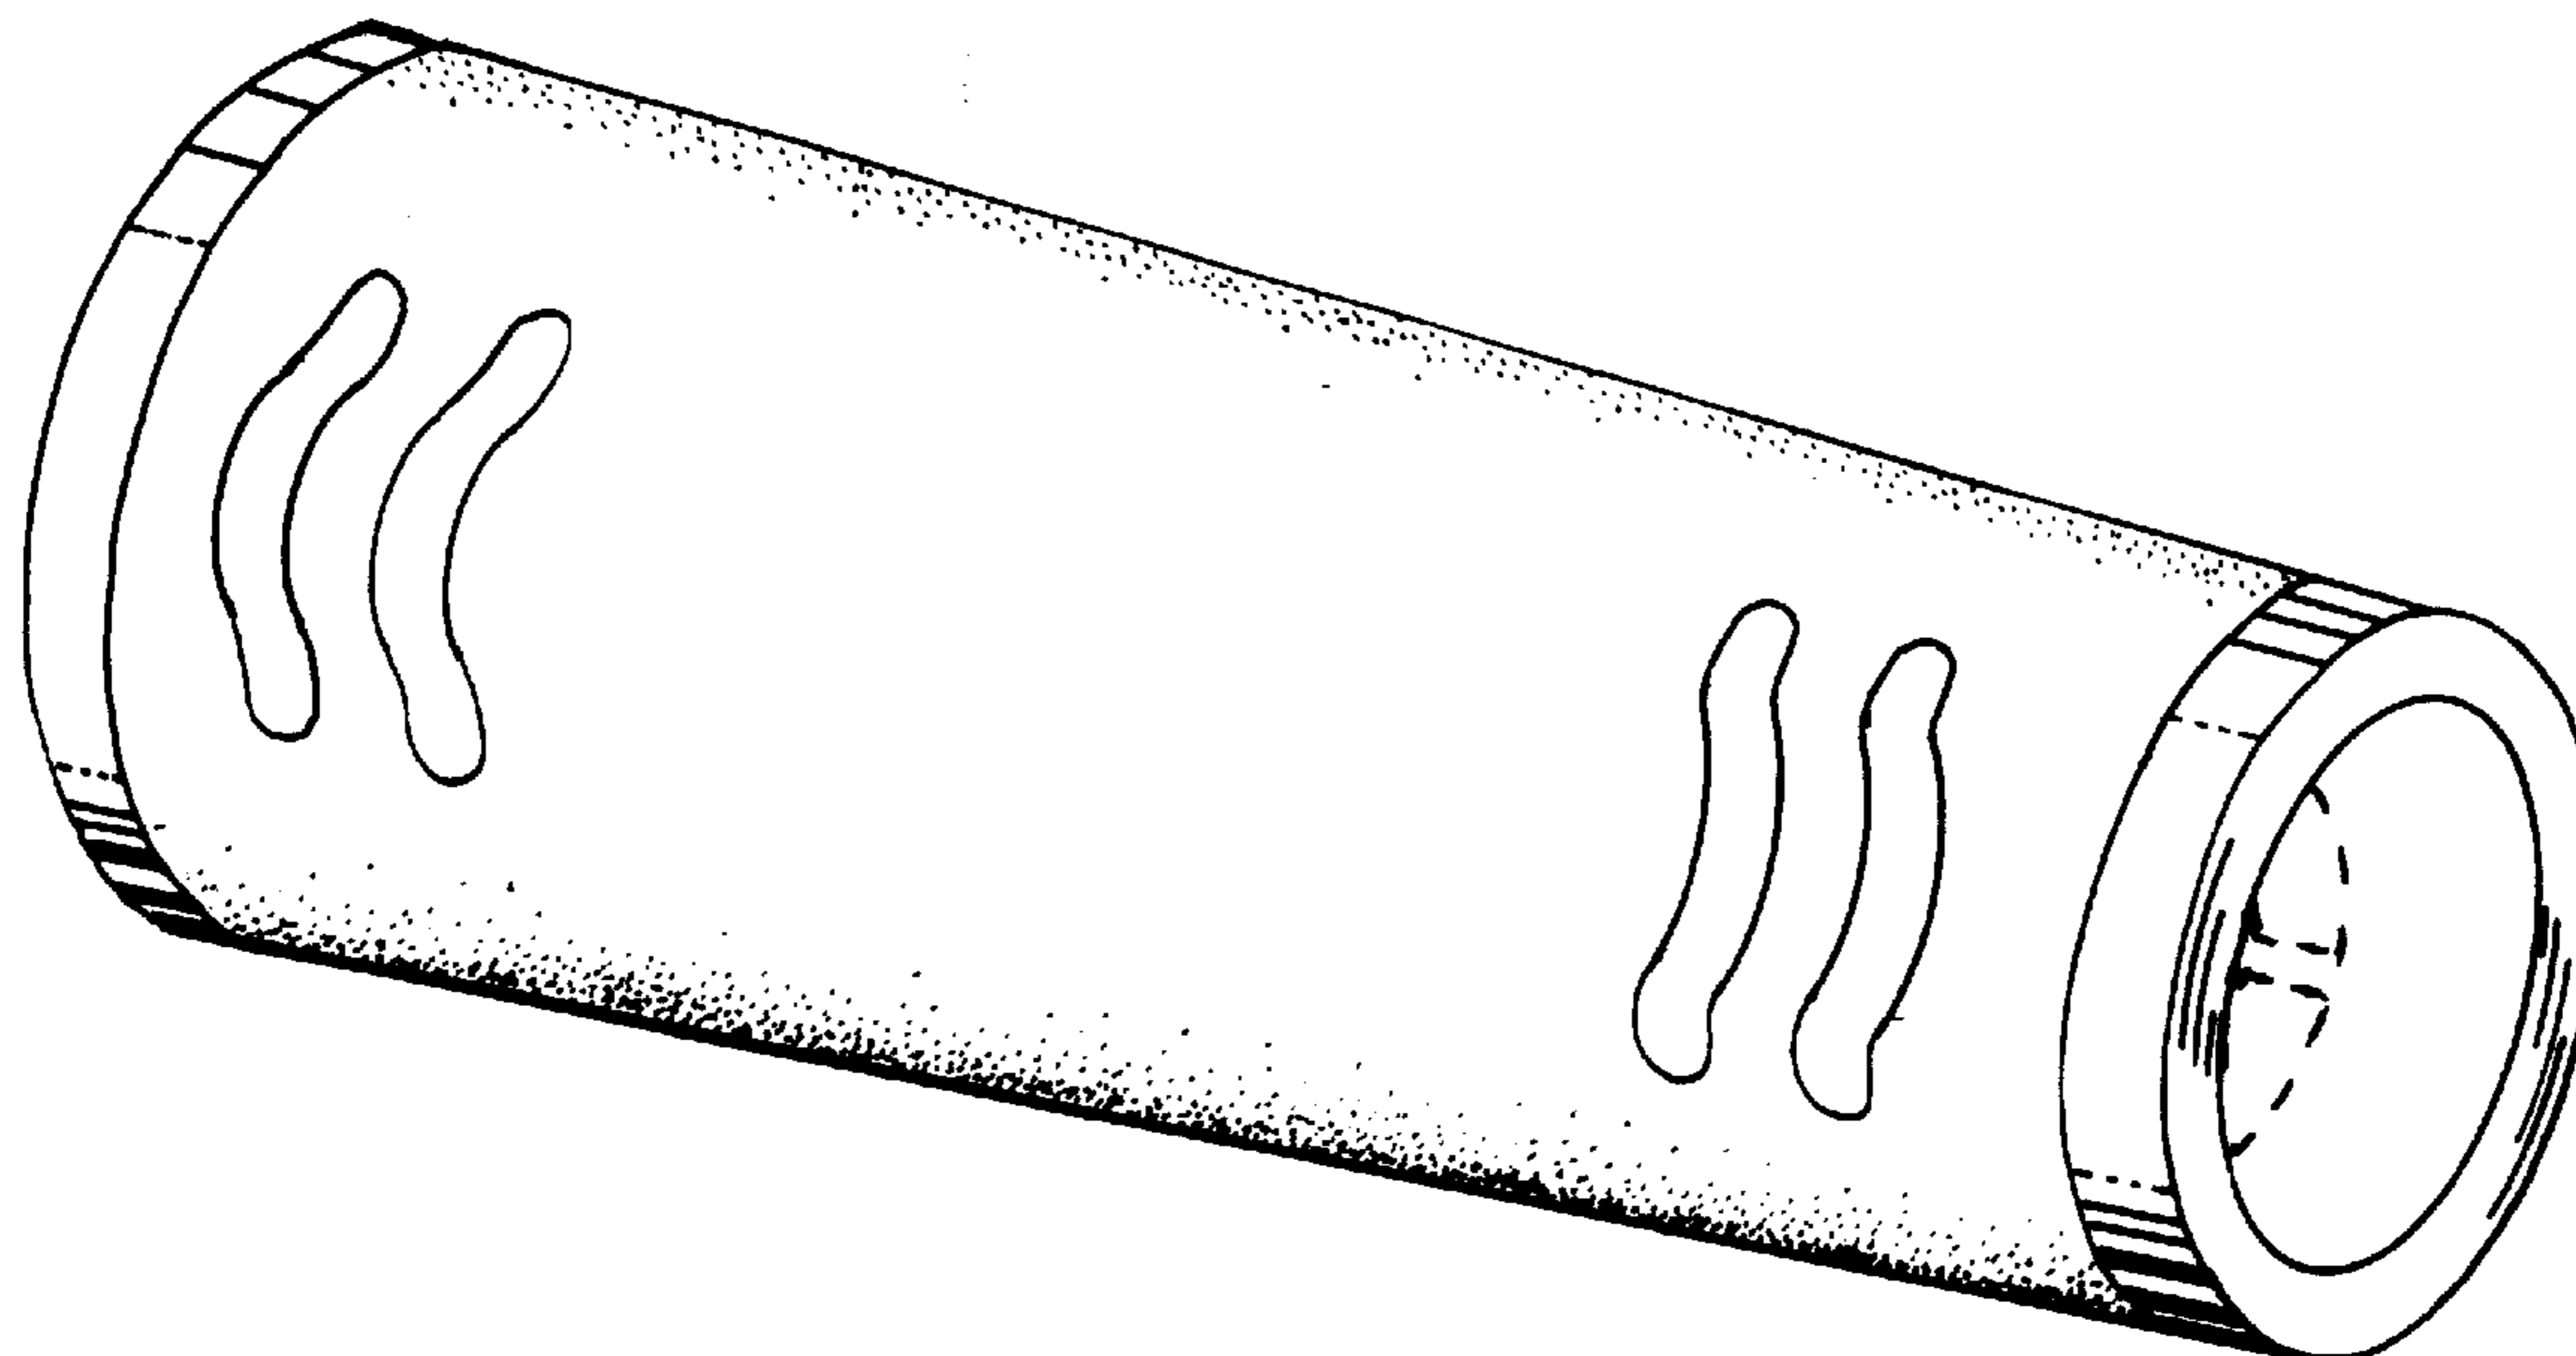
is a perspective view of a tool handle in accordance with the present invention;
